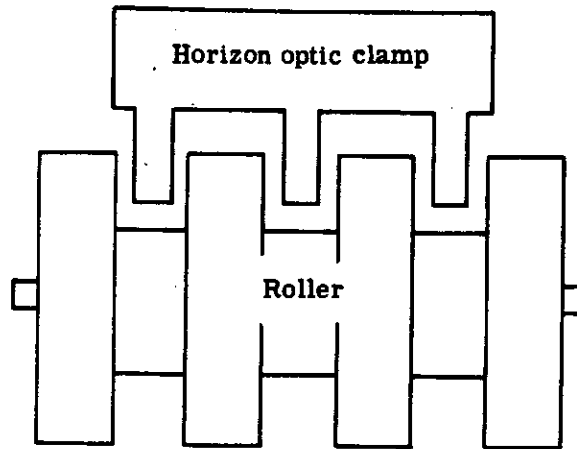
Horizon optic clamp and three-land undercut roller used on CR-6
